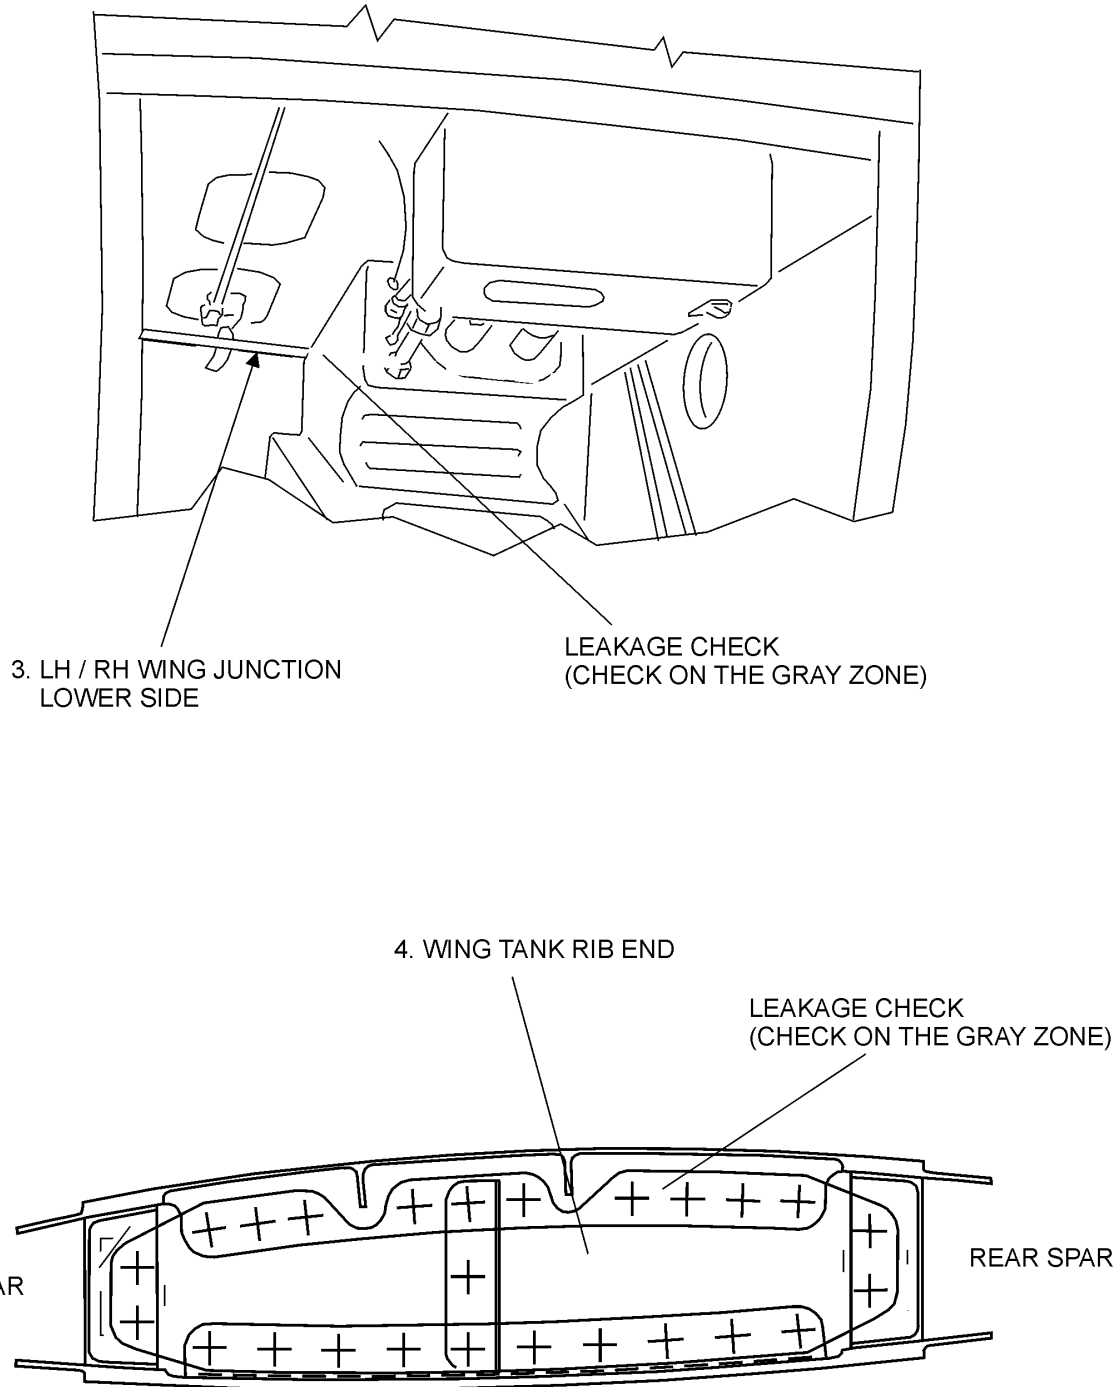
Fuel Tanks Acc. Pan, Components and Structure - Leakage Check (Sheet 2 of 3)
